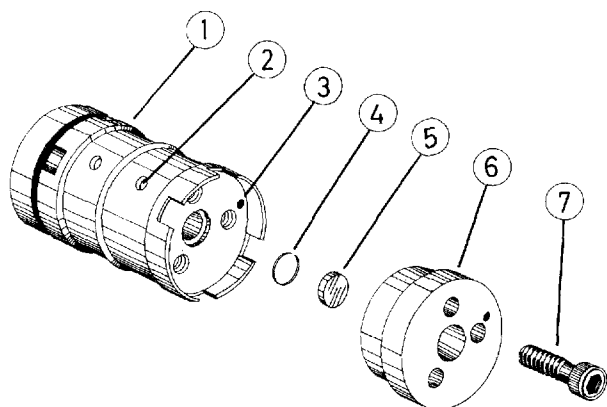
Transmission cell: (1) nickel cell body; (2) hole for positioning the cell in the vacuum desiccator; (3) thermocouple well; (4) gold gasket; (5) diamond window; (6) stainless-steel cover; (7) mild steel bolts.
